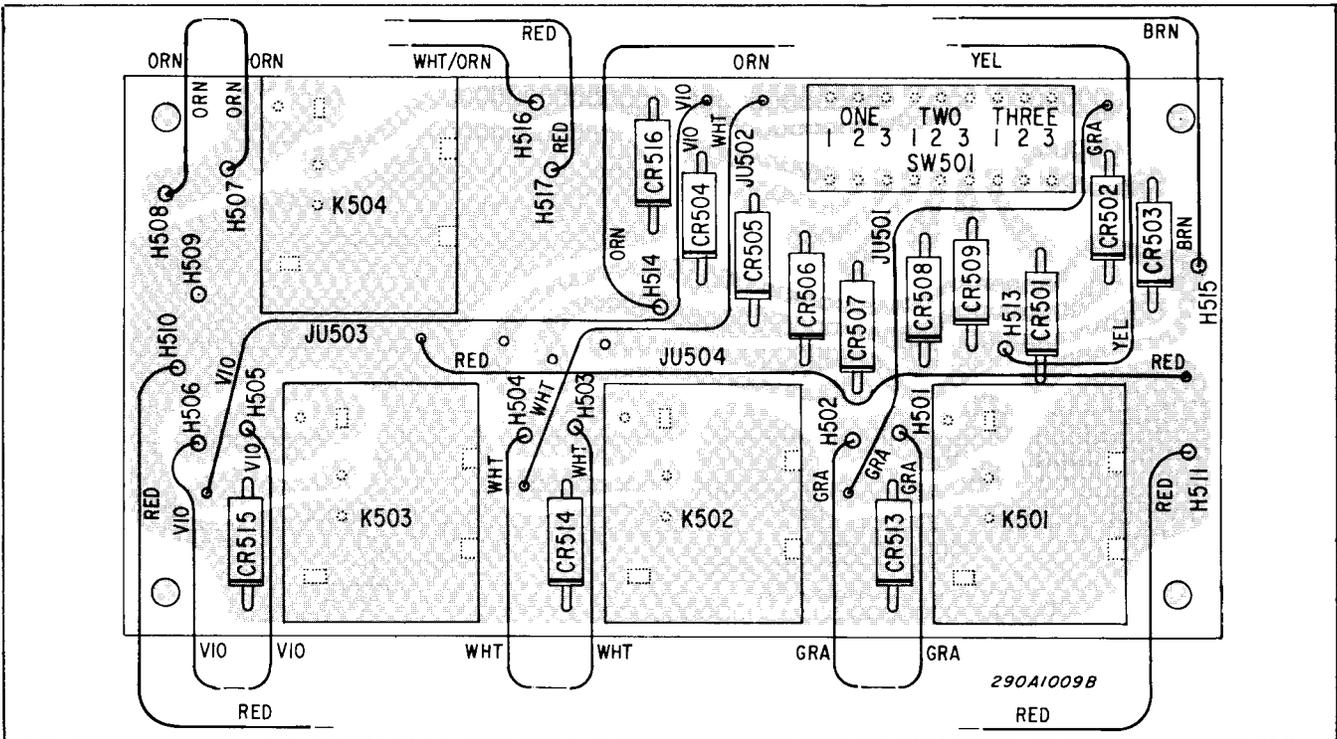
Control Module Relay Circuit Board Parts Location Diagram
